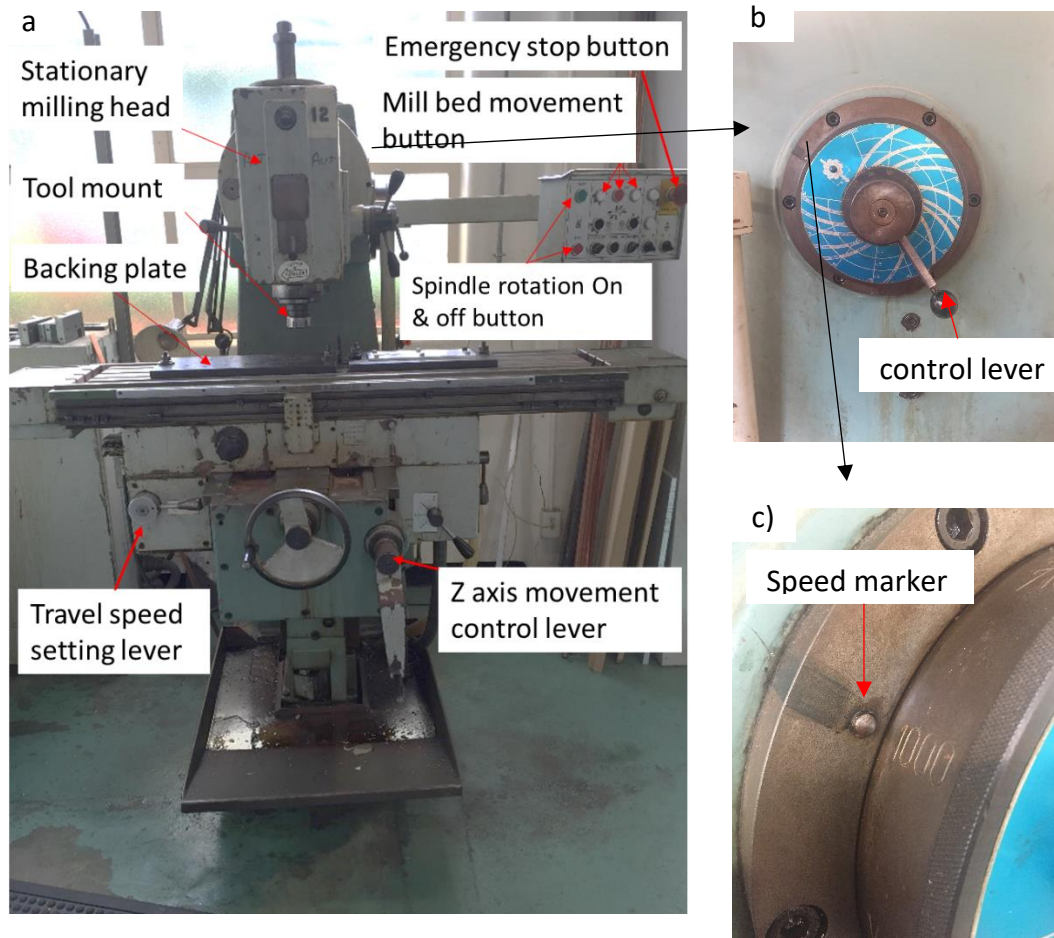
3 (a) Retrofitted Lagun milling machine used throughout the study; (b) Tool rotation speed control in the side of the machine; (c) speed gauge.
